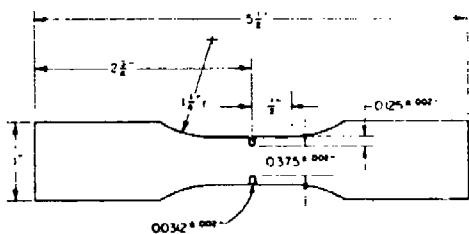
NOTCHED SHEET FATIGUE SPECIMEN
